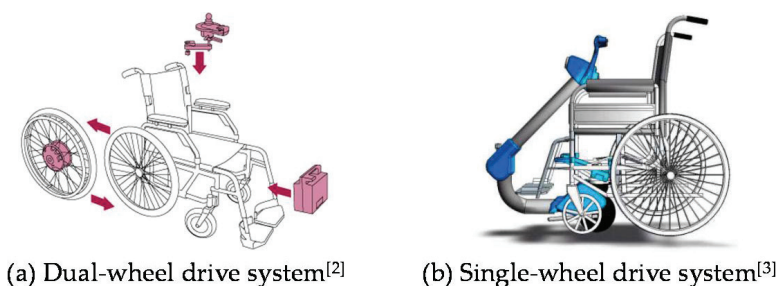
Conventional motorized wheelchair. (a) Dual-wheel drive system [2]. (b) Single-wheel drive system [3].
